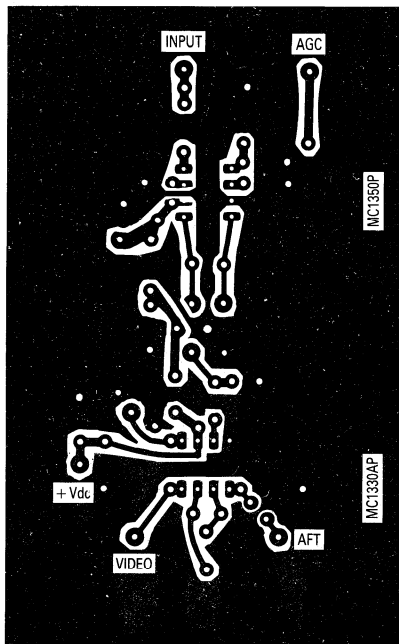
PRINTED CIRCUIT BOARD LAYOUT
